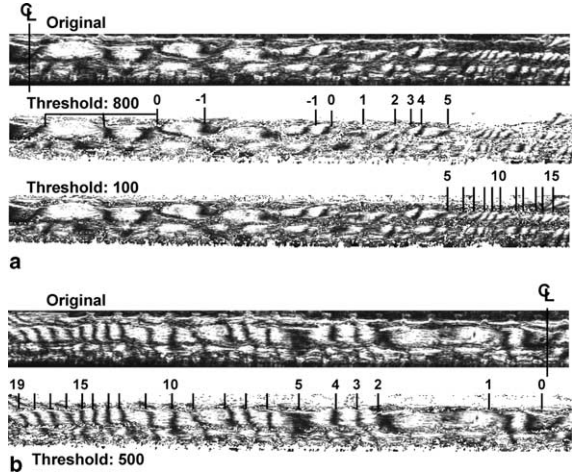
Application of phase shifting filter in counting the fringes for residual warpage of SAC PCB: (a) right half of PCB; (b) left half of PCB.
